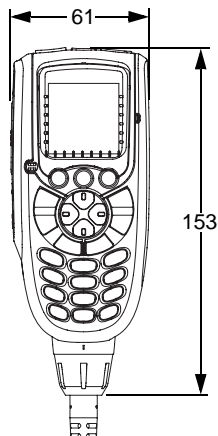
Front View of O3 Control Head with Coiled Cable
